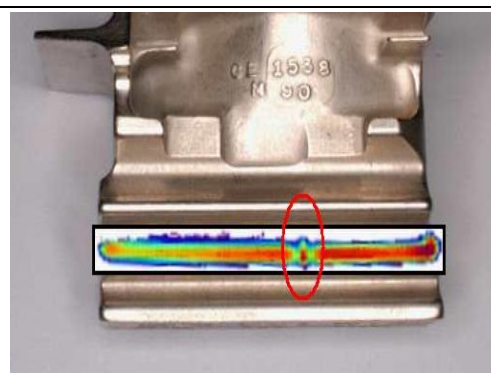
Inspection result: crack in turbine blade (specimen No. 2)
